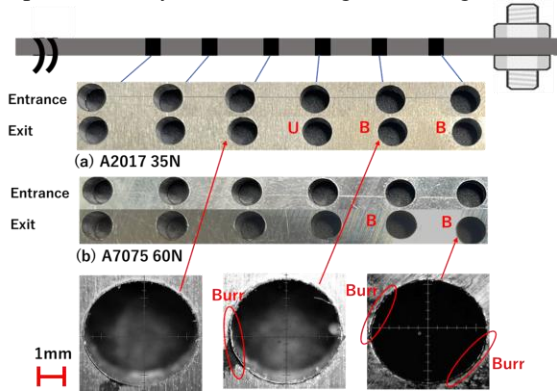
Appearance of workpiece after drilling in A2017 and A7075.
